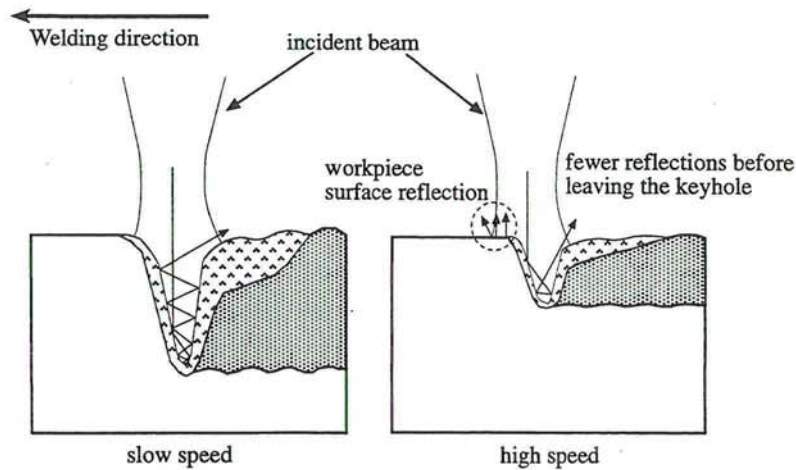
The change of shape of the keyhole and weld pool with increasing speed.
